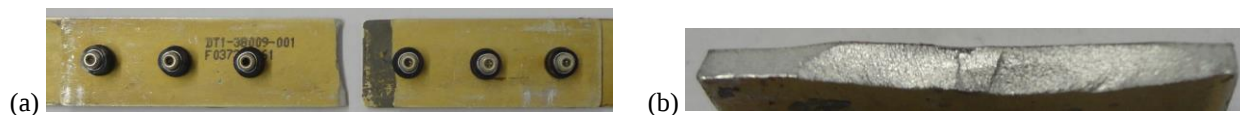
Specimen IB-17 (90 MPa): (a) fracture SP-NC; (b) fractured cross-section
